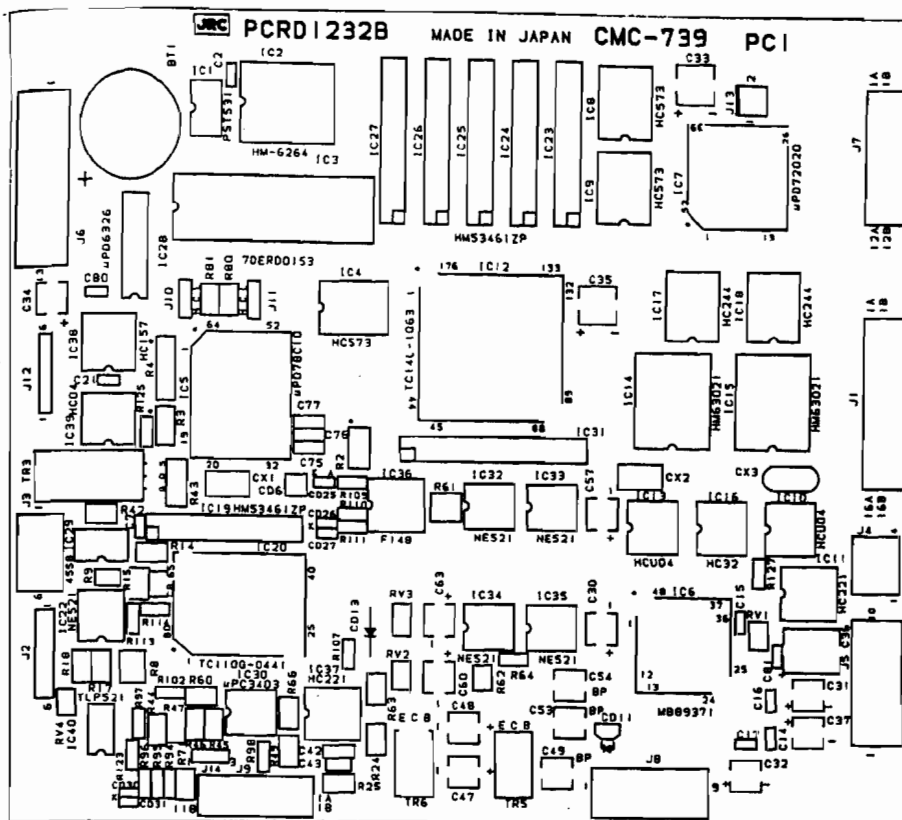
COMPONENT LOCATION DRAWING, MAIN CONTROL PCB (CMC-739)
